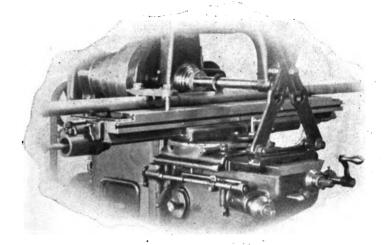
KEYSEATING ON A MILWAUKEE MILLING MACHINE, SHOWING THE TABLE OPERATED FROM THE FRONT OF THE MACHINE.
